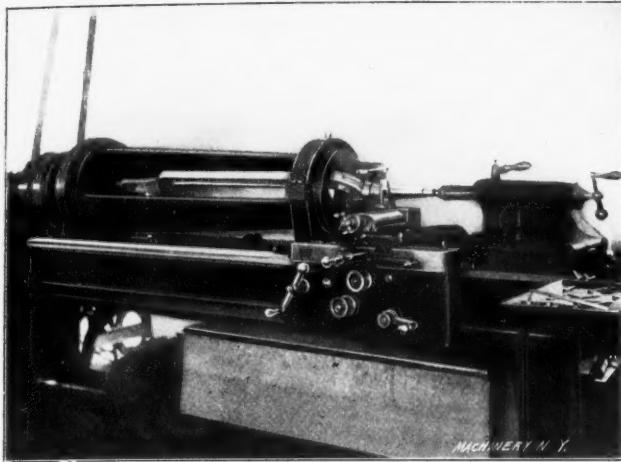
Fixture for Holding Rear Axle while turning Spindles.
